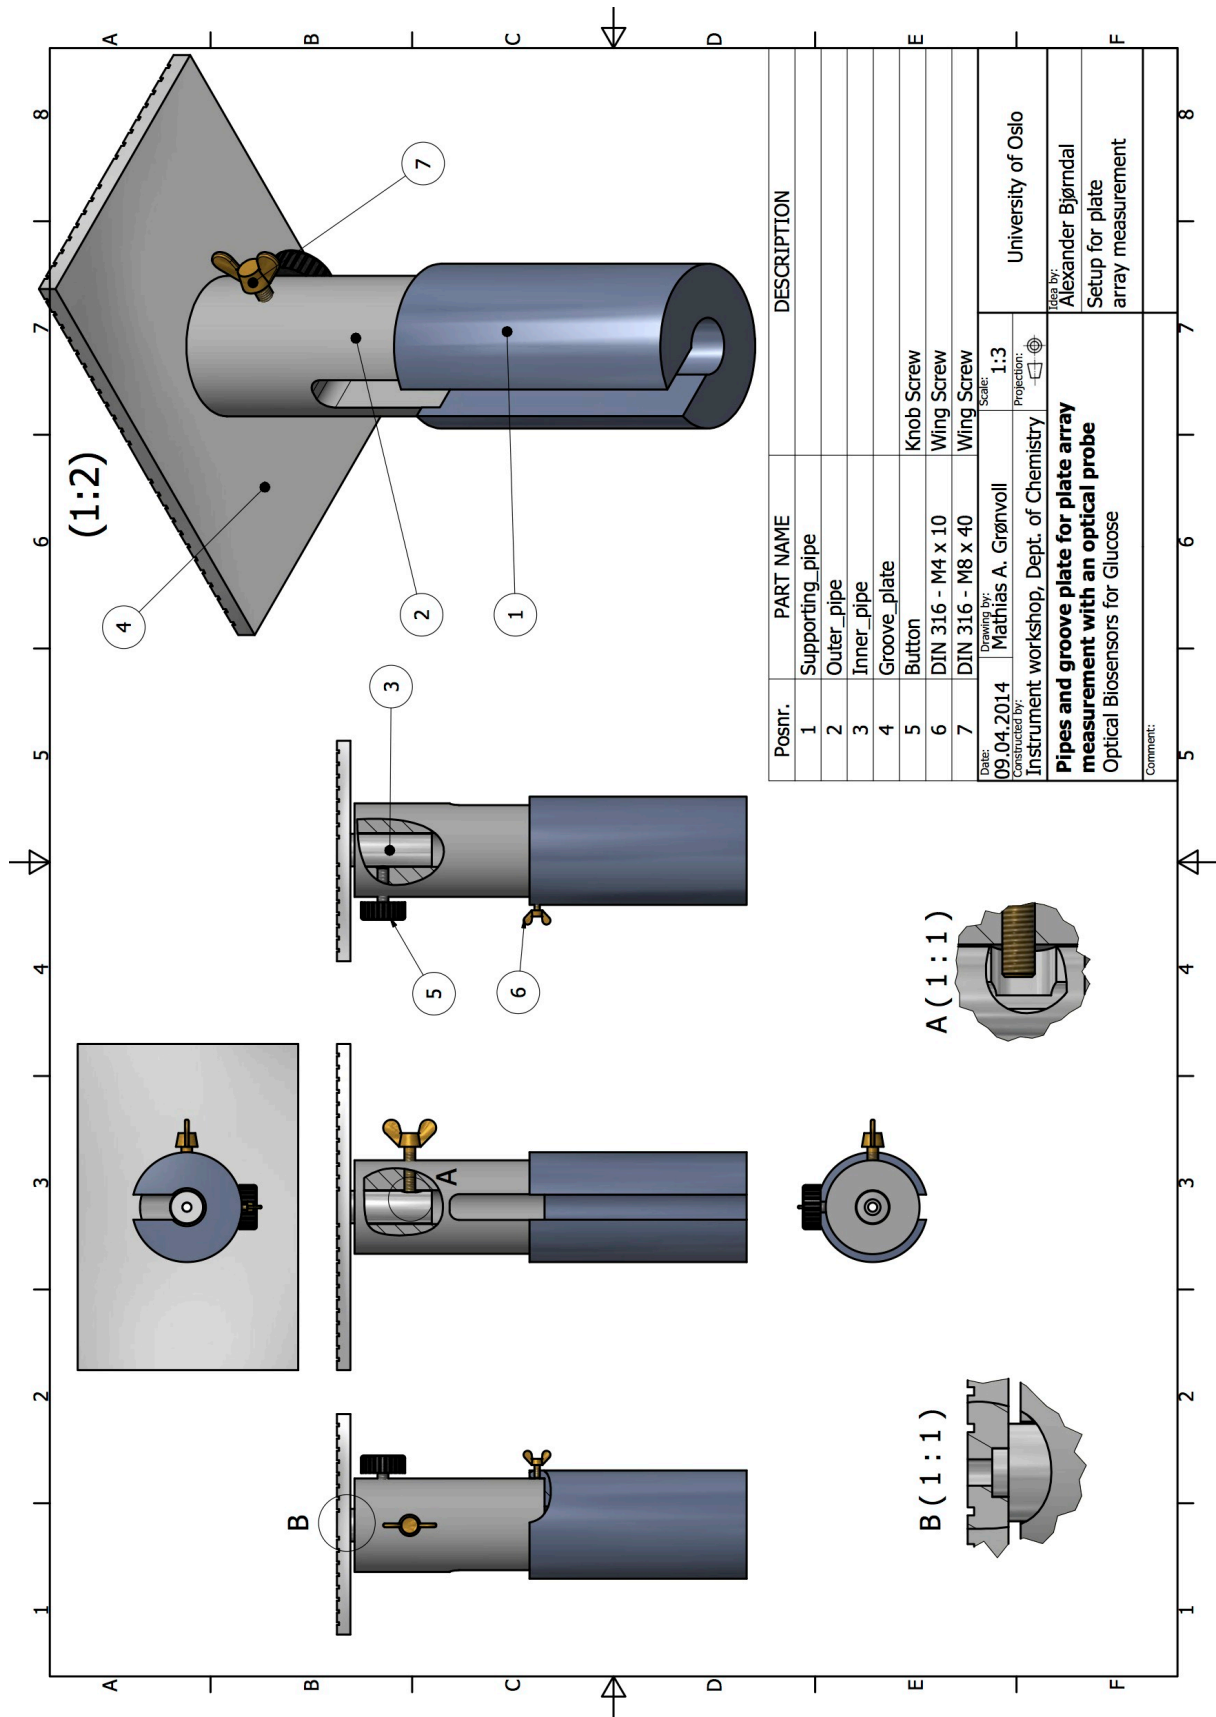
The whole setup for plate array measurement with groove plate and pipes.
